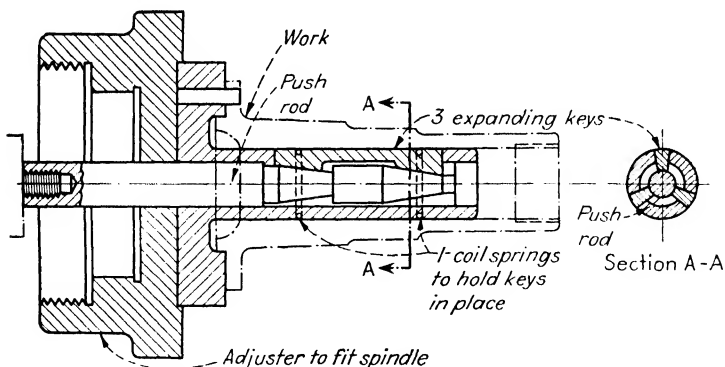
Three expanding keys are held by coil springs at each end. Two cones ensure equal expansion.
